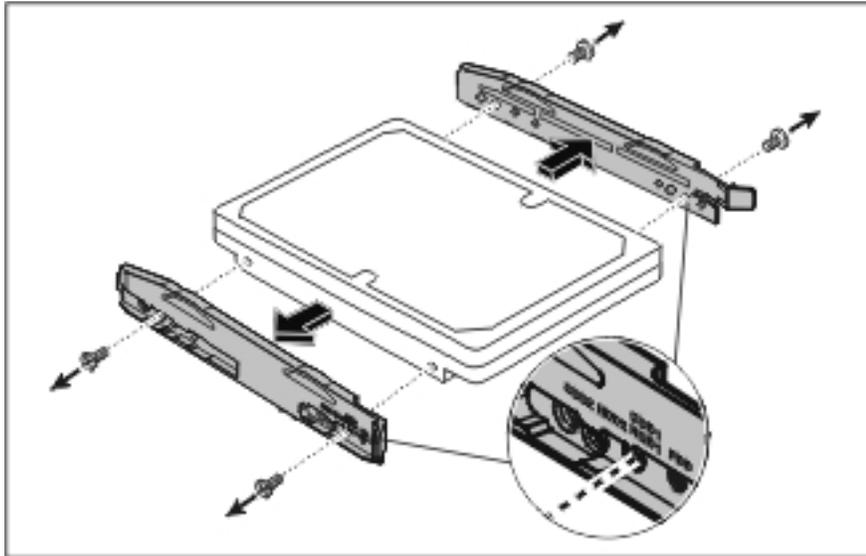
Removing the rails from the non-hot-plug hard drive
